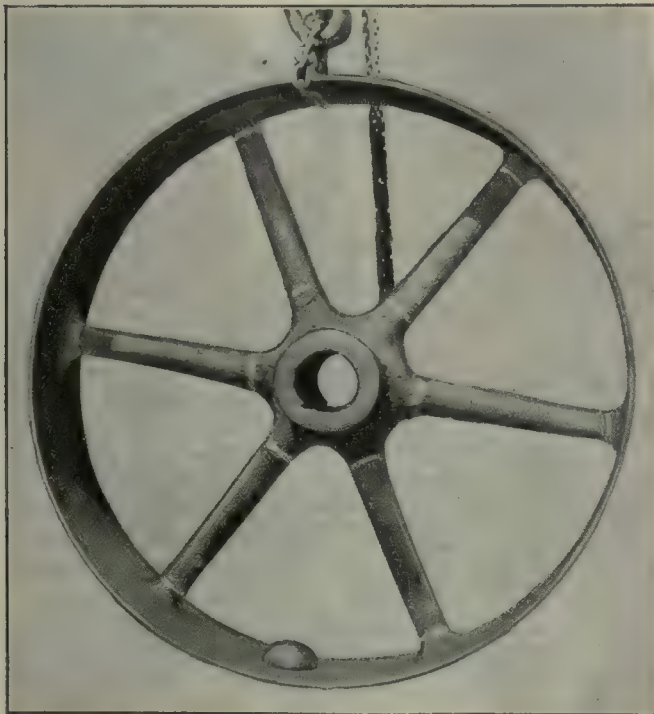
A LARGE PULLEY WELDED IN TWELVE PLACES
